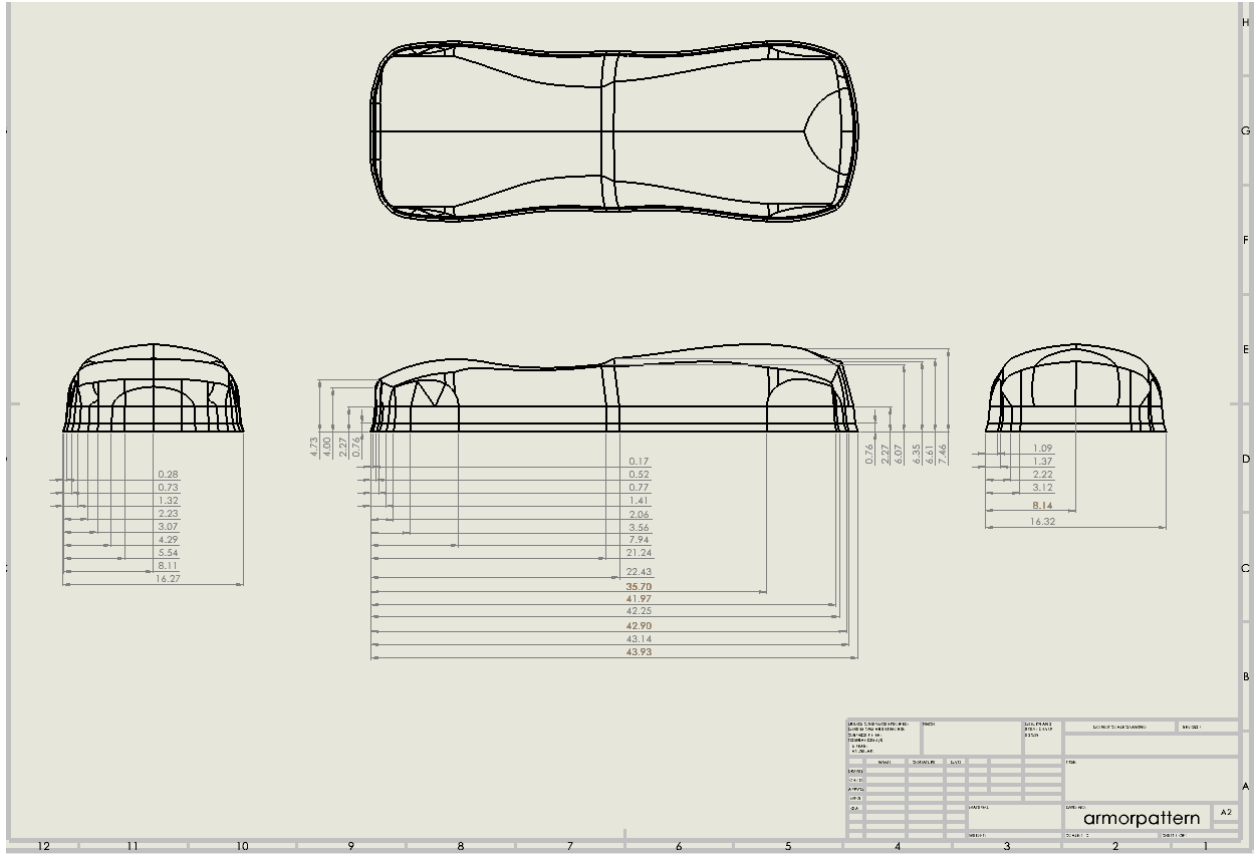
Back Piece and Plackart Tooling Model Engineering Drawing
